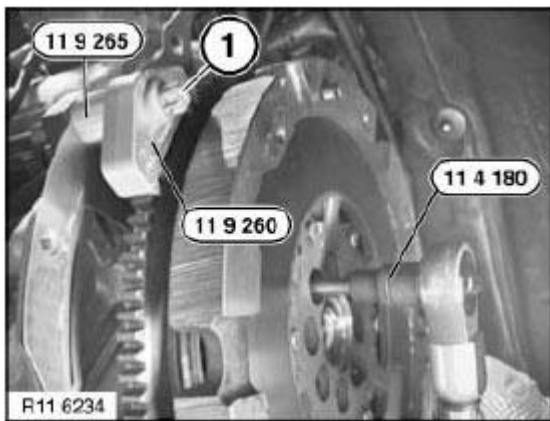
Identifying Existing Transmission Bolt With Special Tools (11 9 255, 11 9 260 And 11 4 180)
